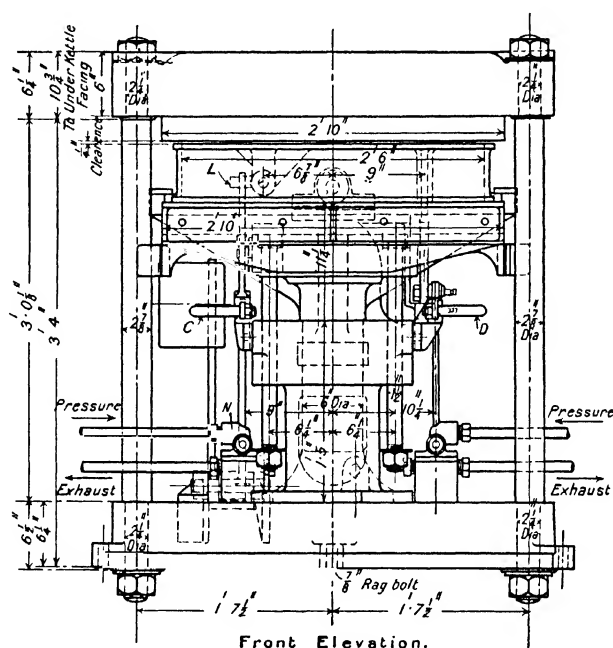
A.—Semi-Automatic Moulding Machine—Rose, Downs & Thompson.
